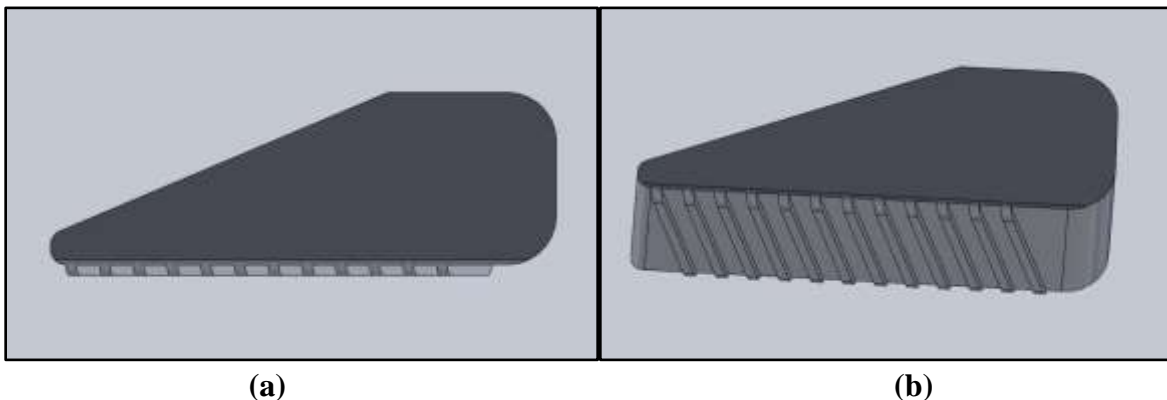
Sock SolidWorks Model, (a) Side Profile of sock model (b) Bottom side includes a diagonal tread design
